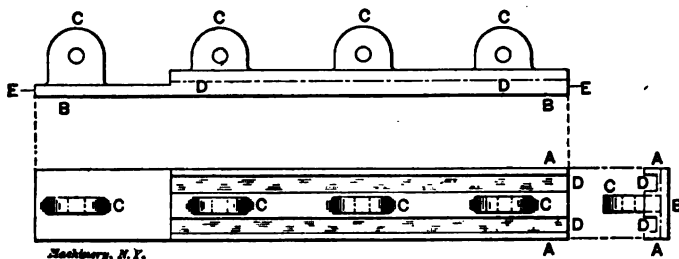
Casting Milled in Fixture shown in Figs 63 to 65.
